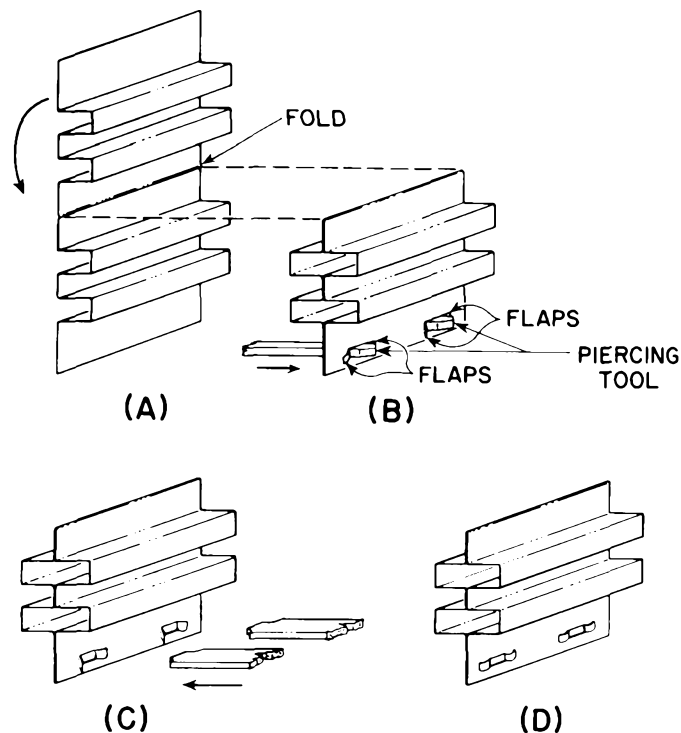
Riveting: (A) formed strip; (B) piercing folded strip; (C) curling and flattening flaps; (D) rivet completed
